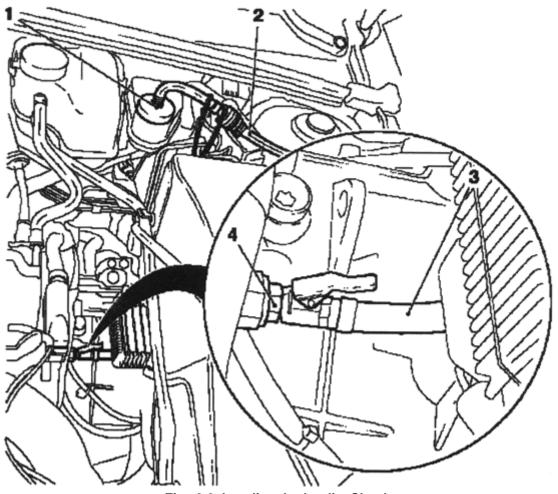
Leveling hydraulic Clutch: 1 - Adapter 2 - a special tool IMC-6174-2; 3 - special tool IMC-6174-1, 4 - valve pumping
